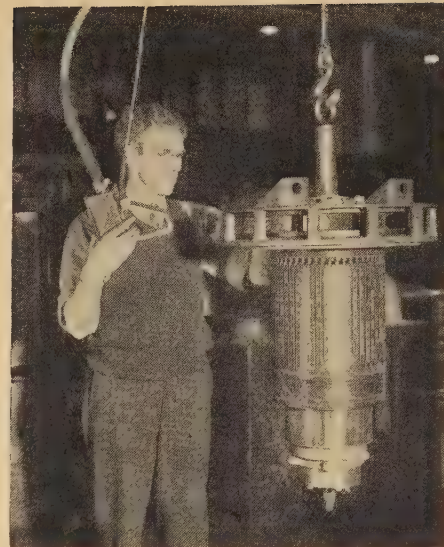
Armature of 140-horsepower trolley-coach motor complete with bearing housings and bearings, weighs only 525 pounds
